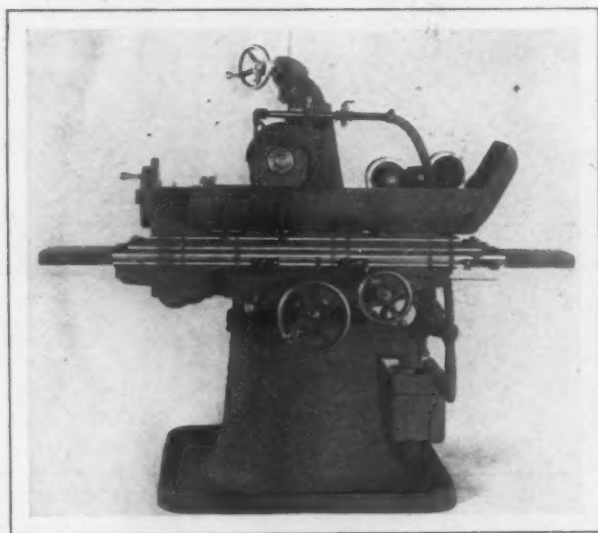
Front View of a New Multiple Keyshaft Grinding Machine Built by the Bath Grinder Company, Fitchburg, Mass.
